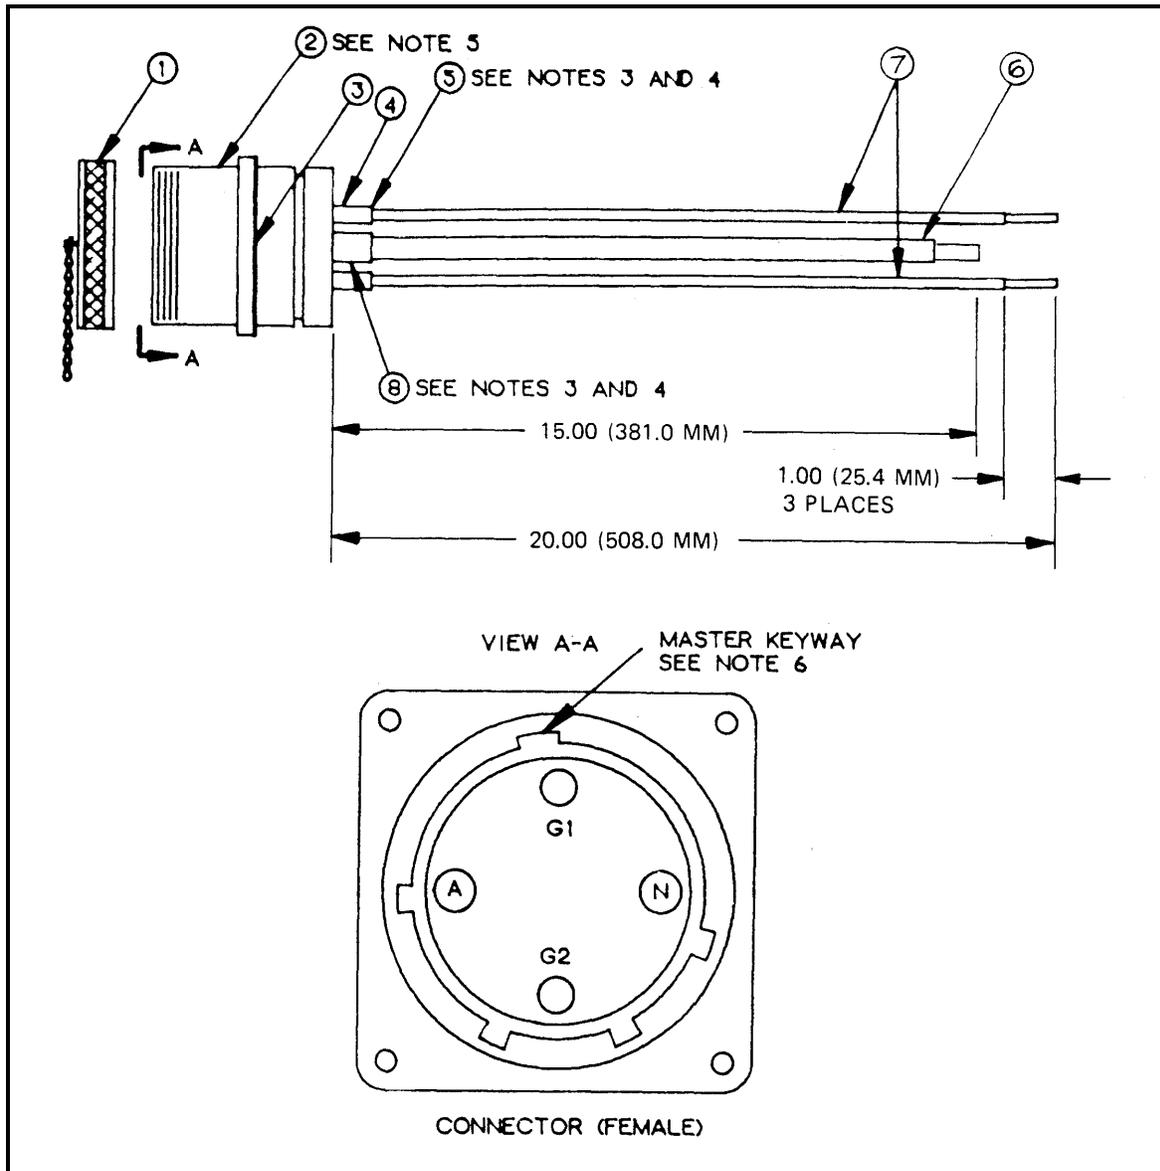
M60 A/P (PDISE), 60-Amp, Output Connector Assembly, (J2)
